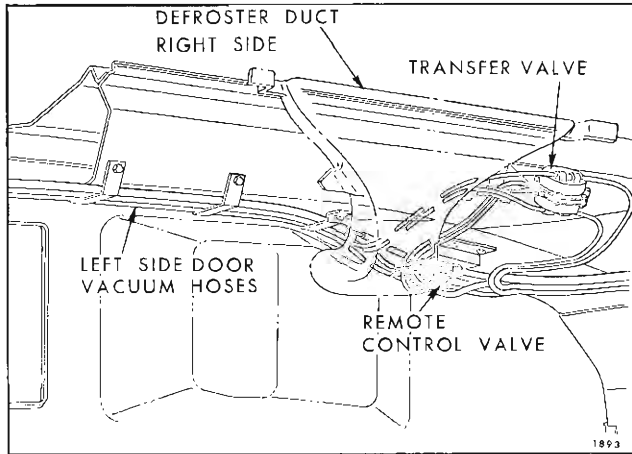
D49—Transfer Valve and Remote Control Valve Installation
